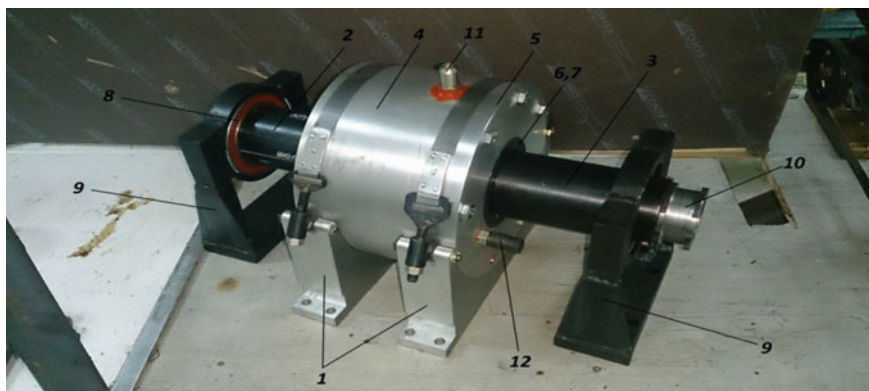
Research object: 1—supports; 2—driven shaft; 3—drive shaft; 4—housing; 5—cover; 6—supporting bearing; 7—gland; 8—retaining bearing; 9—supports; 10—belt drive pulley; 11—oil supply connection; 12—oil outlet connection
